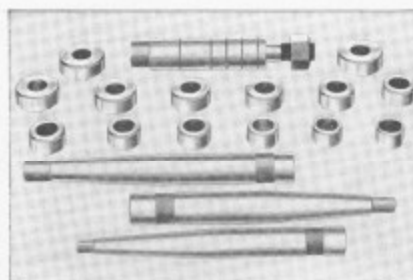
Mandrels and Adapters Used for Mounting Wheels, Hubs and Drums.
